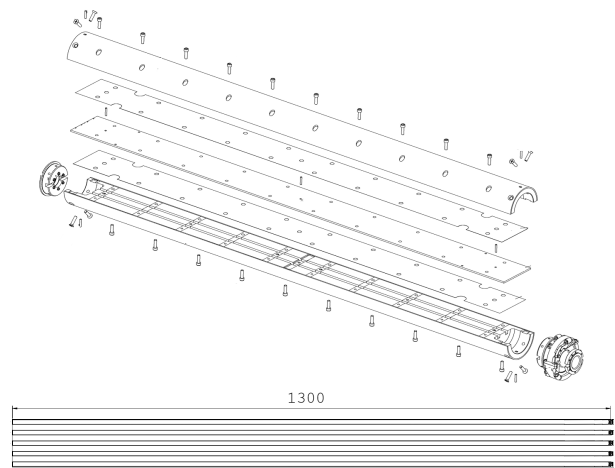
The 1.4-m-long module of the rotating coils chain (top) used for the magnetic measurements at cryogenic temperature: two composite shells hold a PCB plate (bottom) to form a cylindrical structure.
